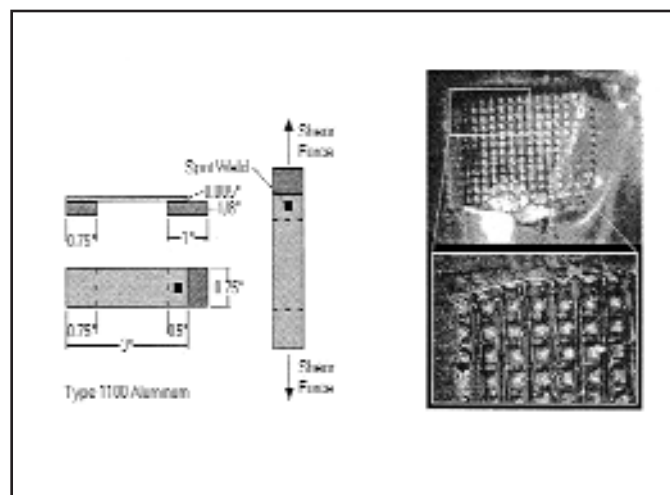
Single-weld specimens for shear tests and ultrasonic weld top view with tearing at edge.
